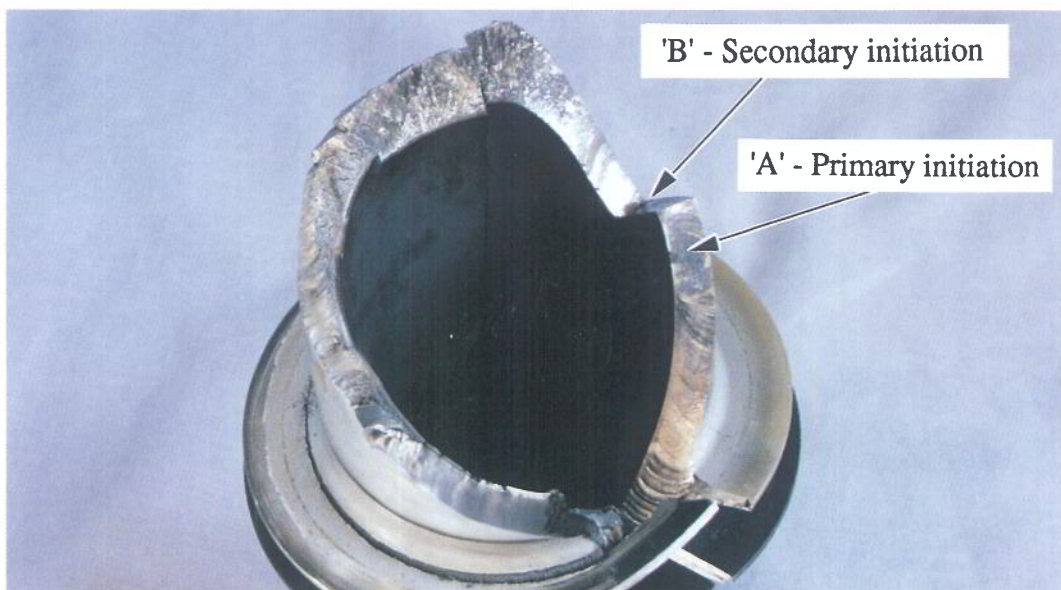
Fracture face of crankshaft from G-NINA
